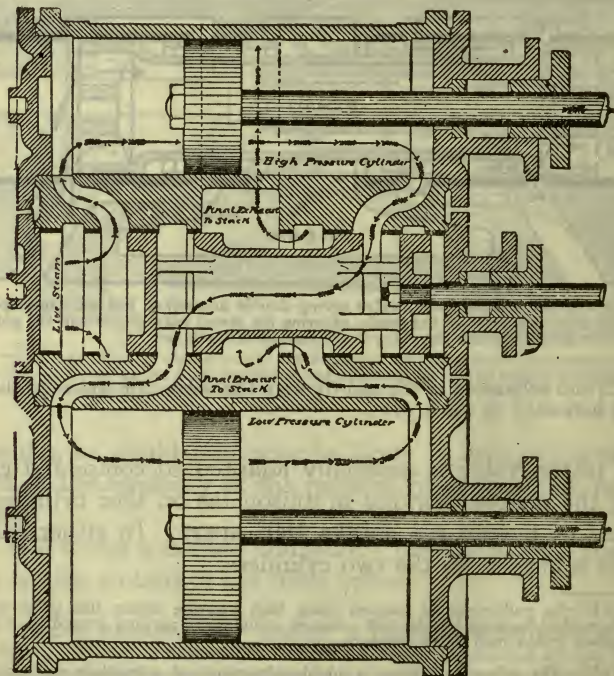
Vauclain piston valve of the Baldwin four cylinder compound locomotive. The pistons move in unison, steam being distributed to the cylinders with a single valve as indicated by the arrows.
